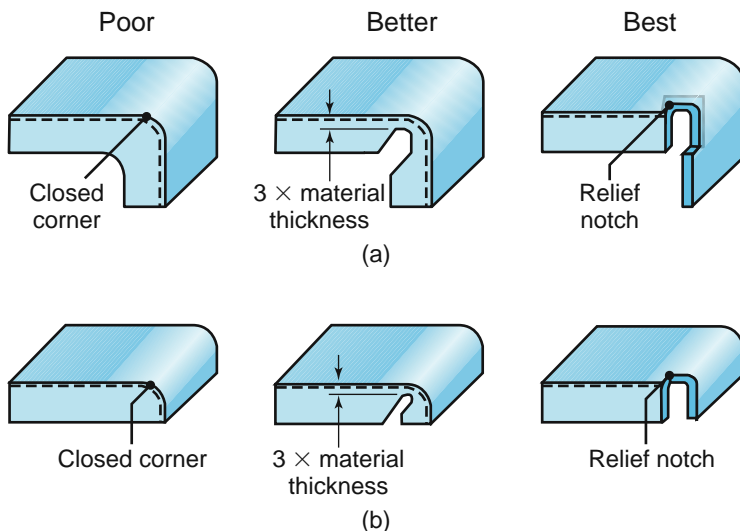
Control of tearing and buckling of a flange in a right-angle bend. *Source:* Courtesy of Society of Manufacturing Engineers.
